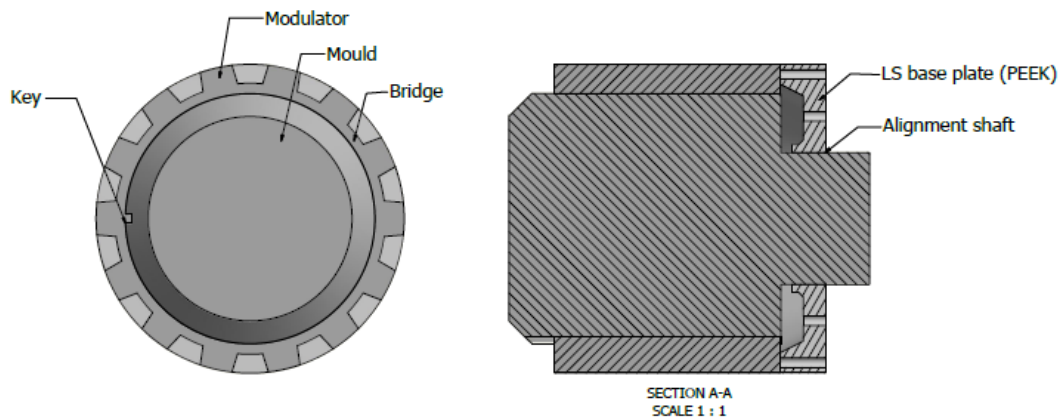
Front view and side view of the casing and PM carrier assembly
